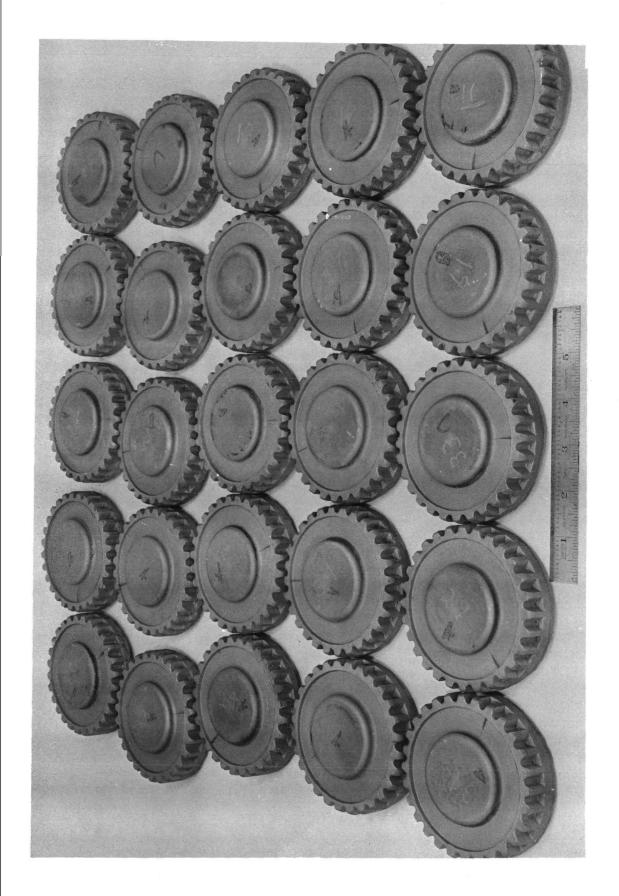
Parts Made During "Production" Run of Ausformed Gears
